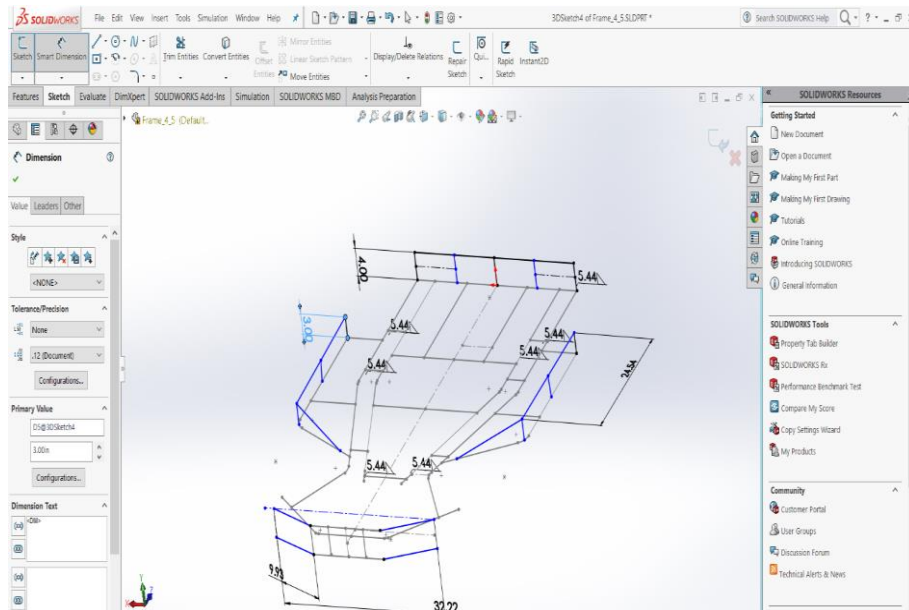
(d) - Modelling of the second frame (Dimension-IV)
